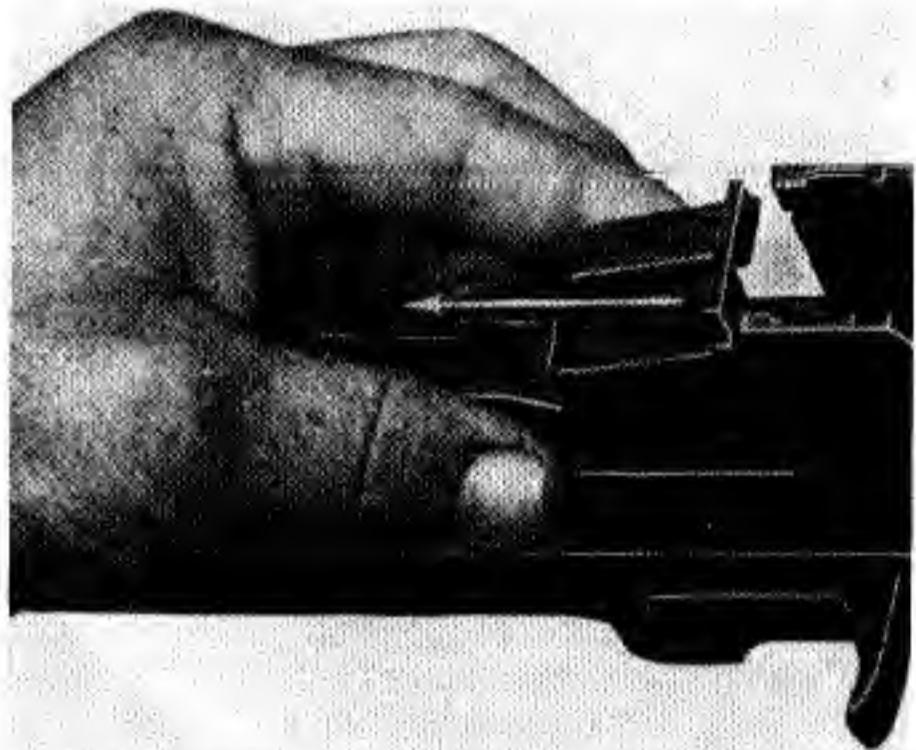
Removing the bullet guide, follower arm & operating rod catch.
